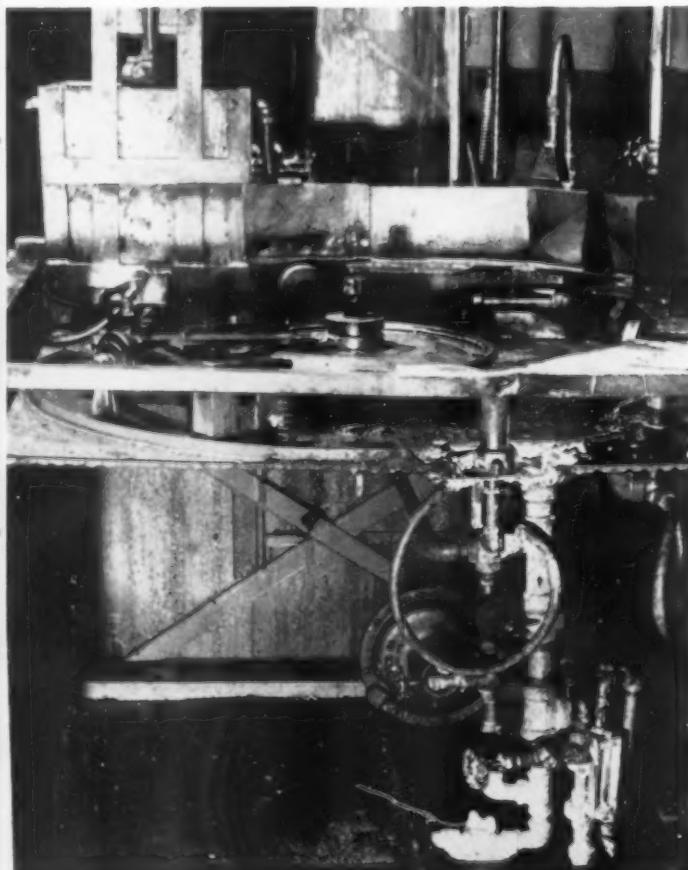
In the base of the unit are the burner bodies, air and gas regulators and reducing valves, and a pan to catch the coolant.
